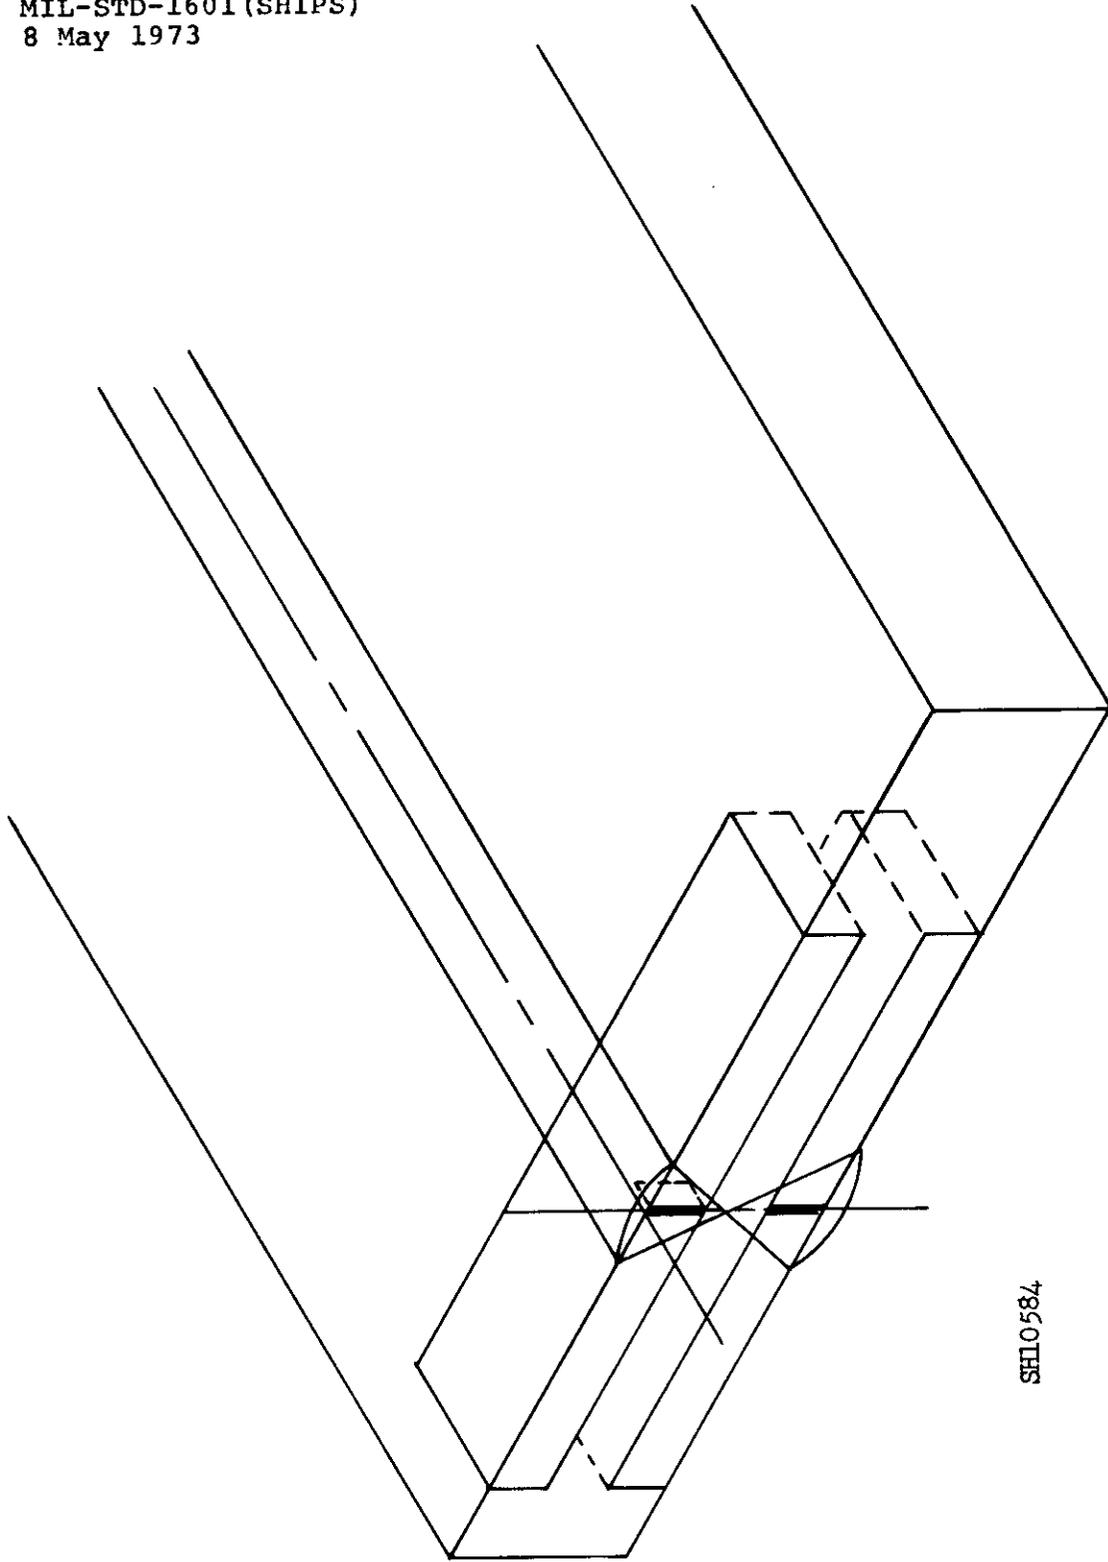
Weld metal geometry to specimen dimension relationships for weld metal 5/8 inch DT specimen.
